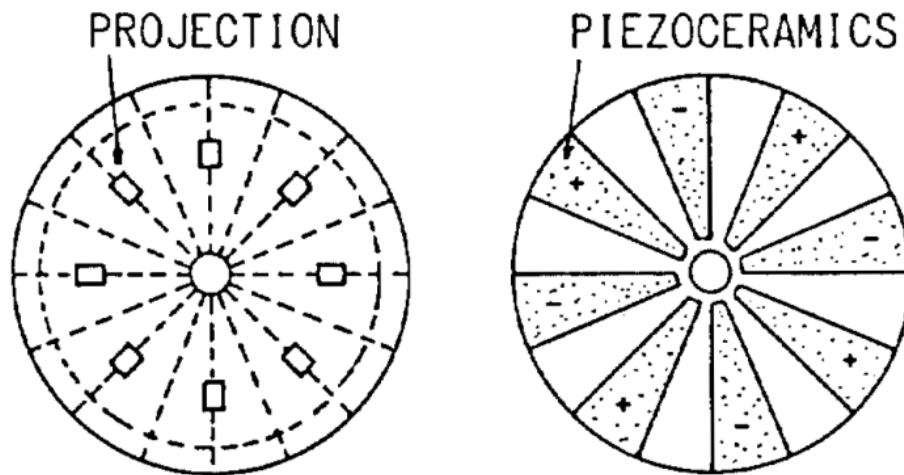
Disk type motor configuration by Takehiro [14].
